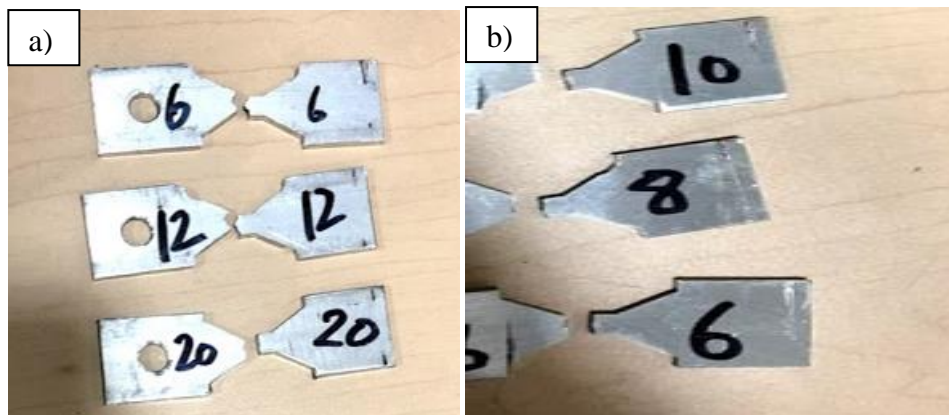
Dummy samples for testing and calibration the fatigue machine. a) Before grinding, b) After grinding.
